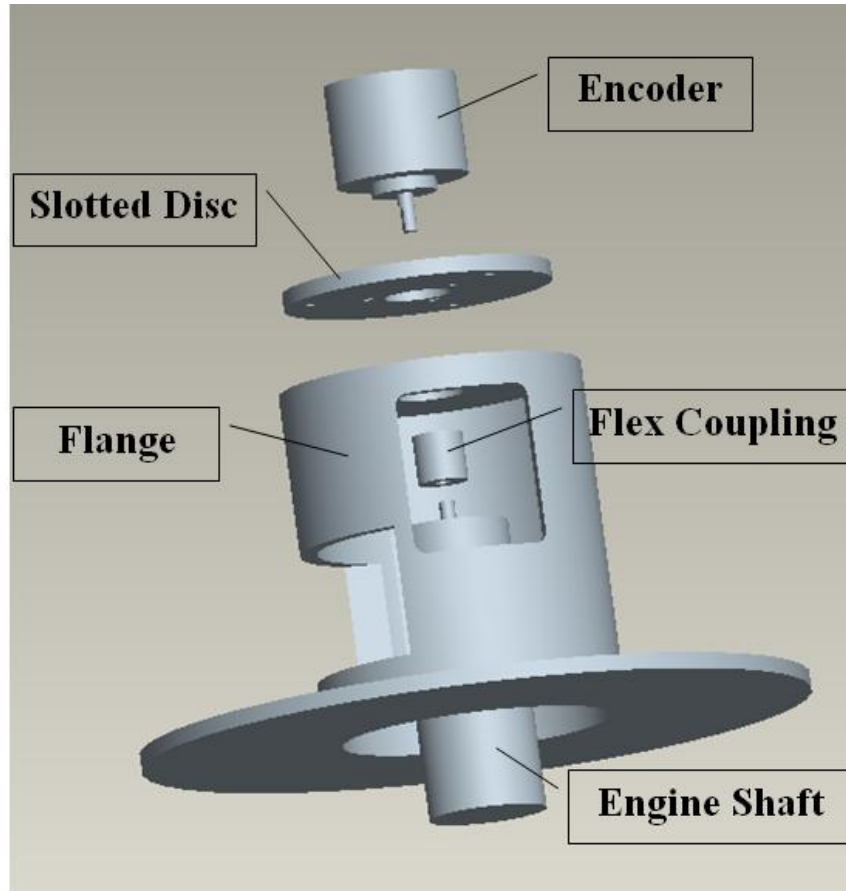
The Mounting Setup of the Encoder (Nelson, 2010)
